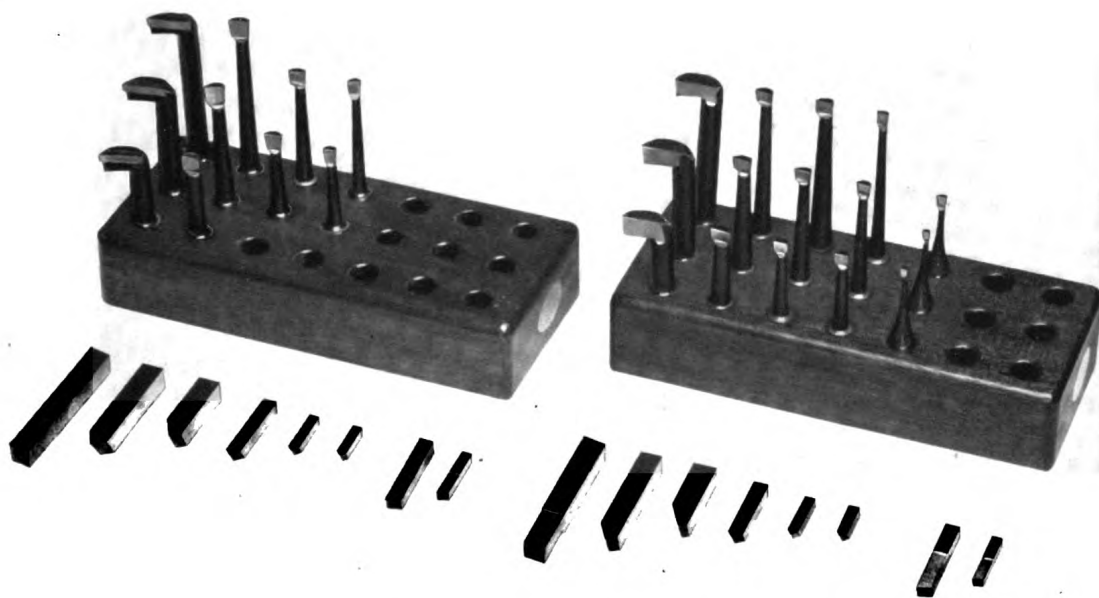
Boring bits for chucks, boring bars and sweep tools.
